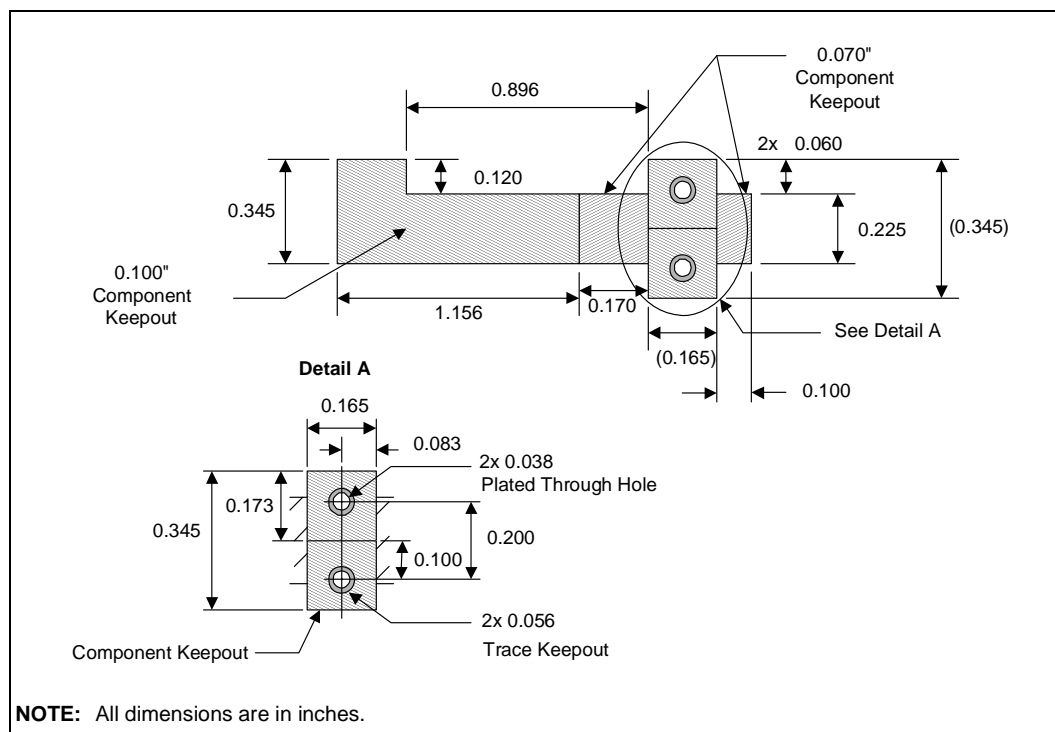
Intel® 6700PXH 64-Bit PCI Hub Torsional Clip Heat Sink Board Component Keep-out
